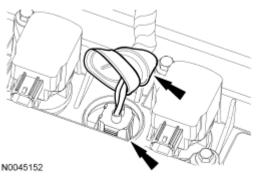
Locating Coil-On-Plug Electrical Connectors Courtesy of FORD MOTOR CO.
